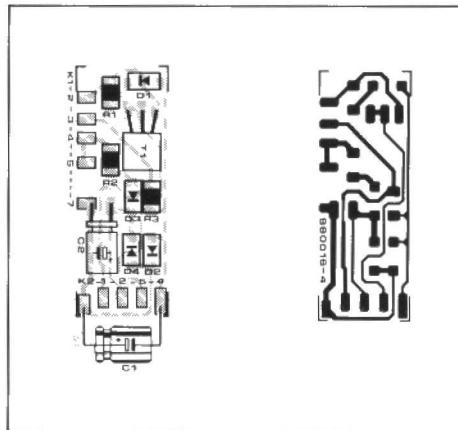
True-size track layout and component mounting plan of the RS232-to-current loop adaptor. The circuit is built mainly in surface-mount technology. To facilitate soldering, the component overlay is not actually printed on boards supplied through the Readers Services.
